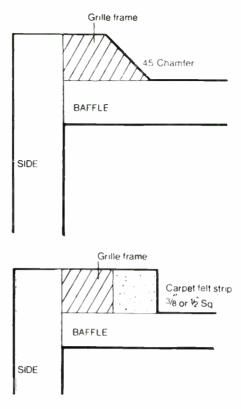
Grille frame construction details show methods of either beveling the inner edge or adding jute rug pad material to diminish diffraction problems.
